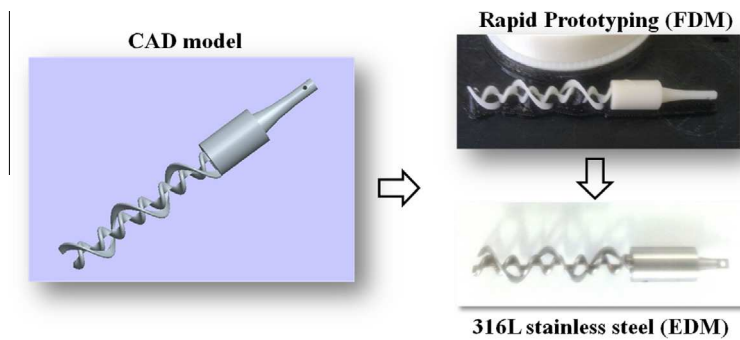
DHI manufacturing process: design, rapid prototyping through FDM and final tool produced with EDM.
